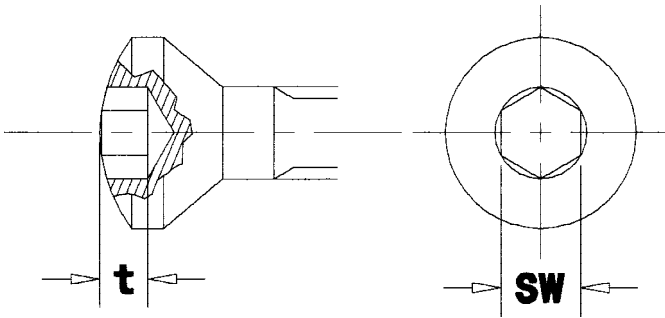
Schematic of Screw with Hexagonal Drive Connection (Table A6.6)
